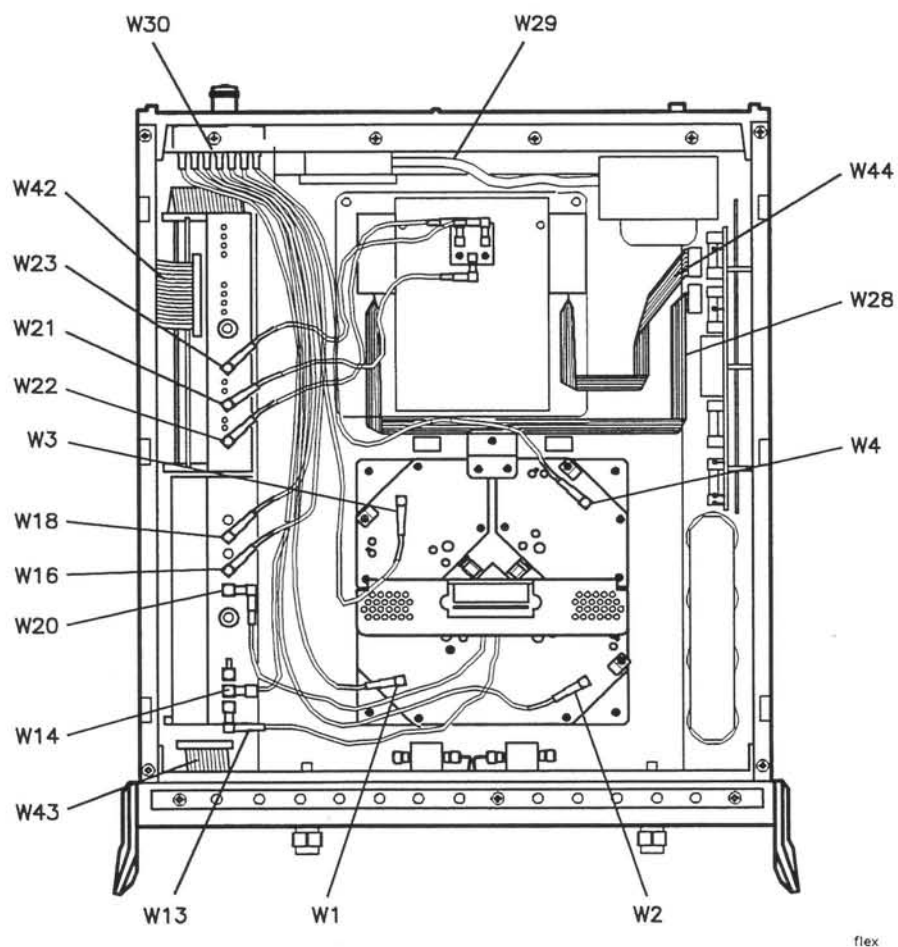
HP 8517B Standard Instrument Flexible Cable Assemblies
